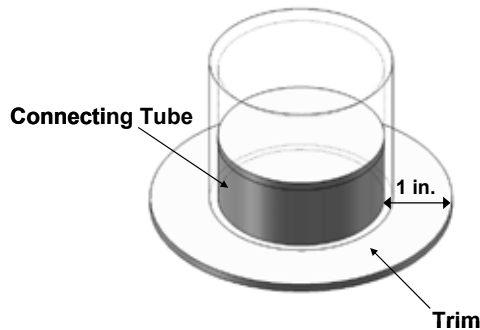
Heatsink with a 1 in. (25.4 mm) trim
